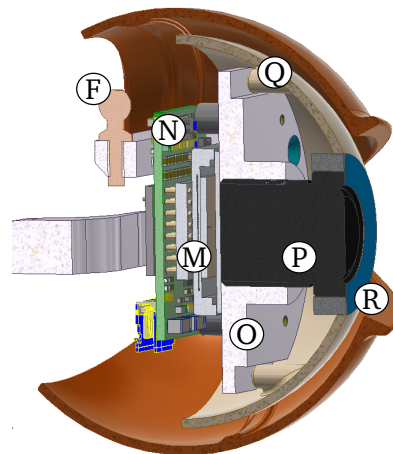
A CAD rendering of a cross-section of the proposed eyeball design.
